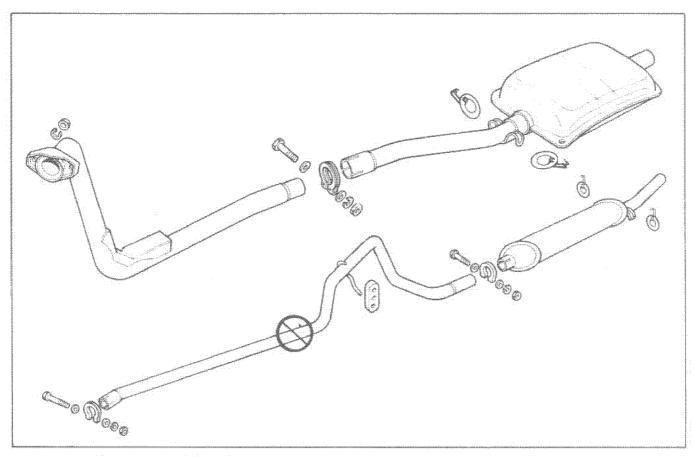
Renault 18 exhaust system showing pipe connections and support brackets
